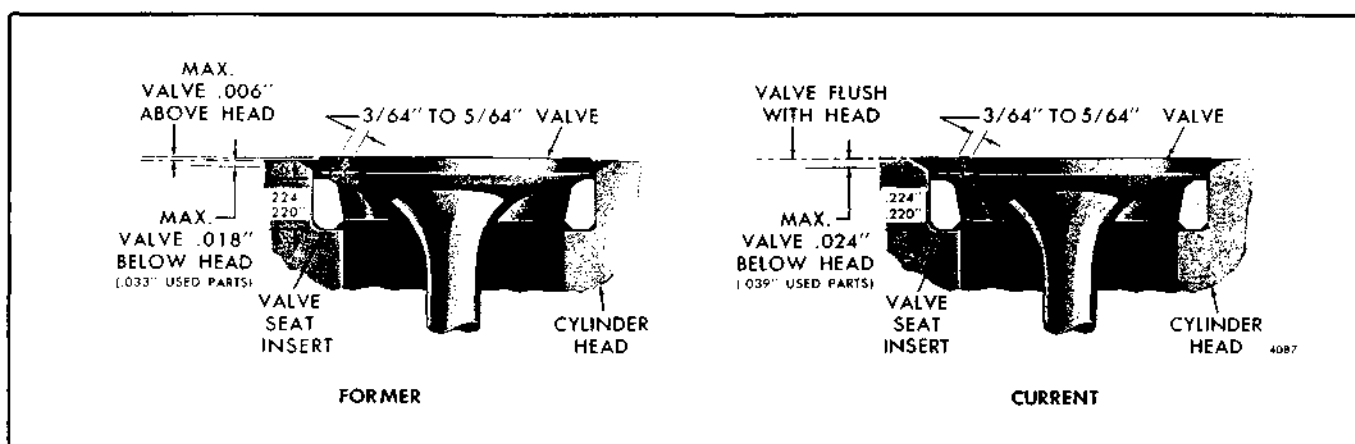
Relationship Between Exhaust Valve, Insert and Cylinder Head (Four Valve Head)
